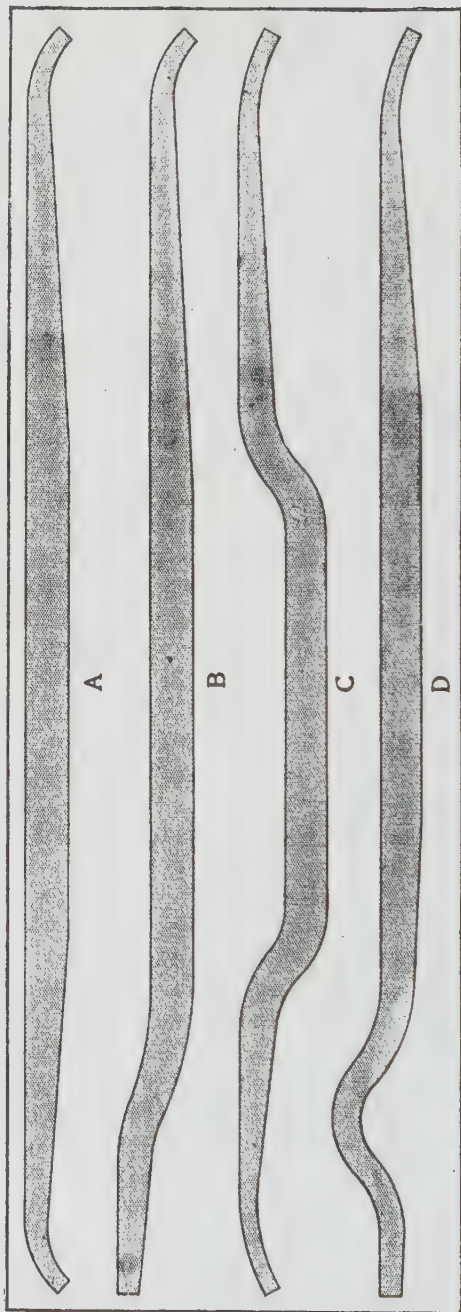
SIDE VIEWS OF FRAME RAILS.
